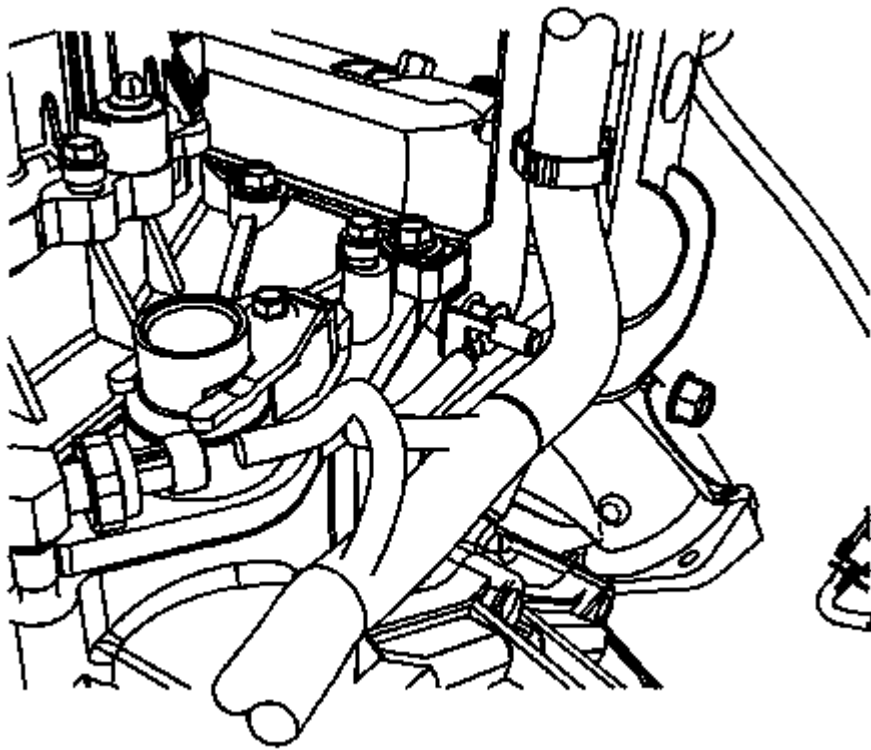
View Of Engine Wiring Harness Ground Nut & Ground Wire
